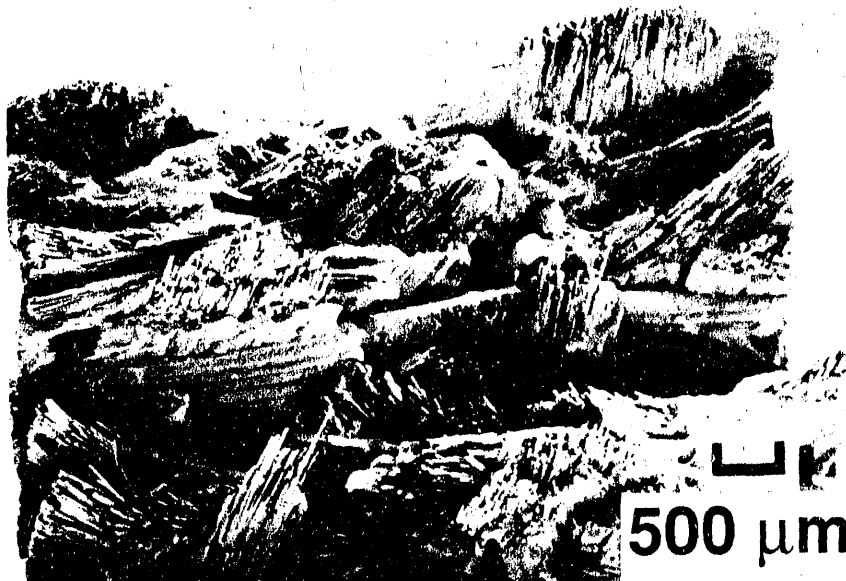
Overall fracture surface of (0-30-60) lay up sample.
